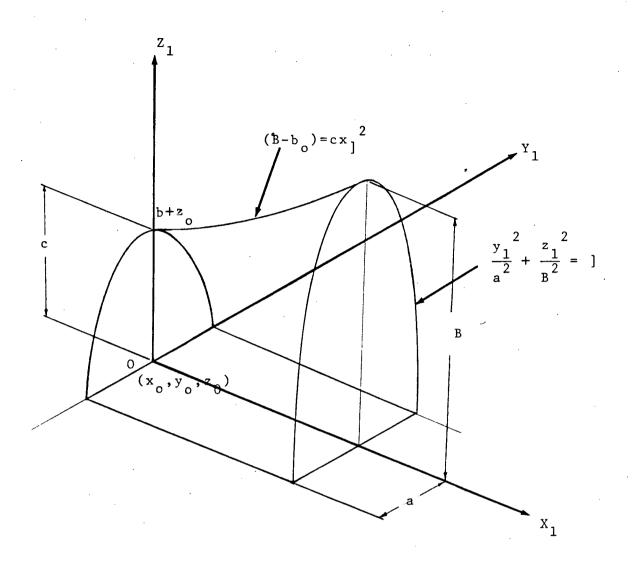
Initial proposed sketch of vacuum cleaner housing mould
